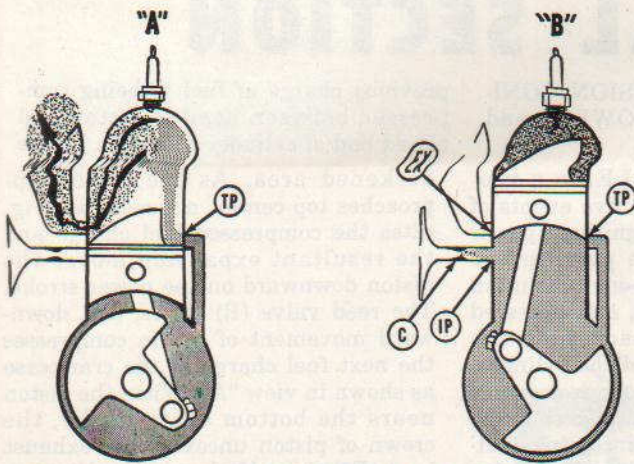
Two cycle, three port engine. Principles are similar to reed valve or rotary valve types except that a third, intake port is located in cylinder wall and opened and closed by the piston skirt.
